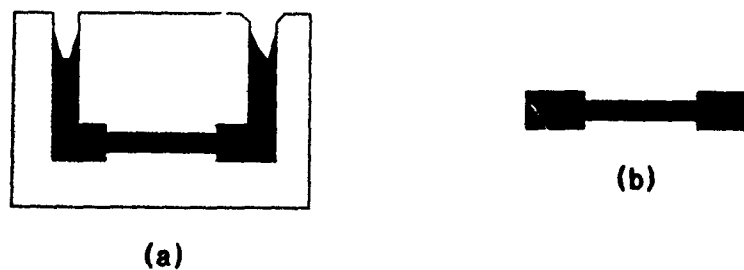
Solid casting: (a) casts into a solid piece; (b) and casting is removed after partial drying.
